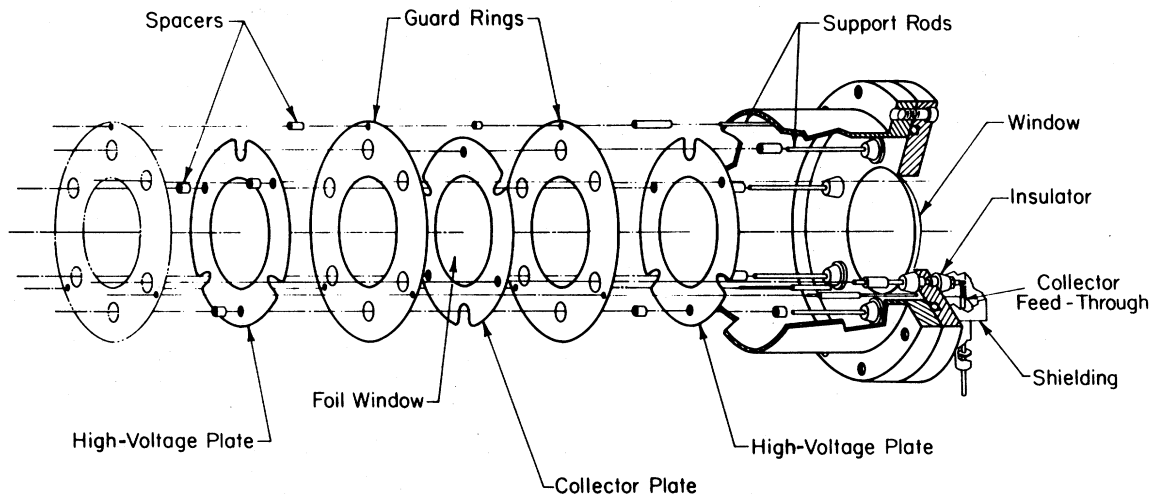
Exploded view of a portion of an ionization-chamber assembly.
